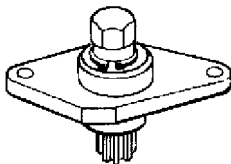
View of Flywheel Turning tool (49FA 42 065)
